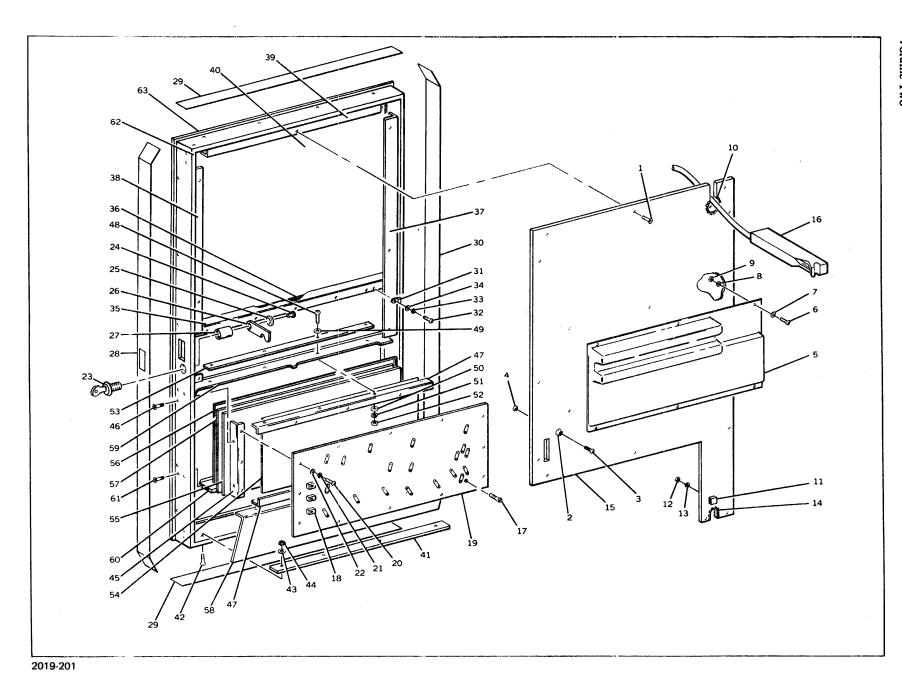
A500 Door Assembly (02116-6286), Exploded View
